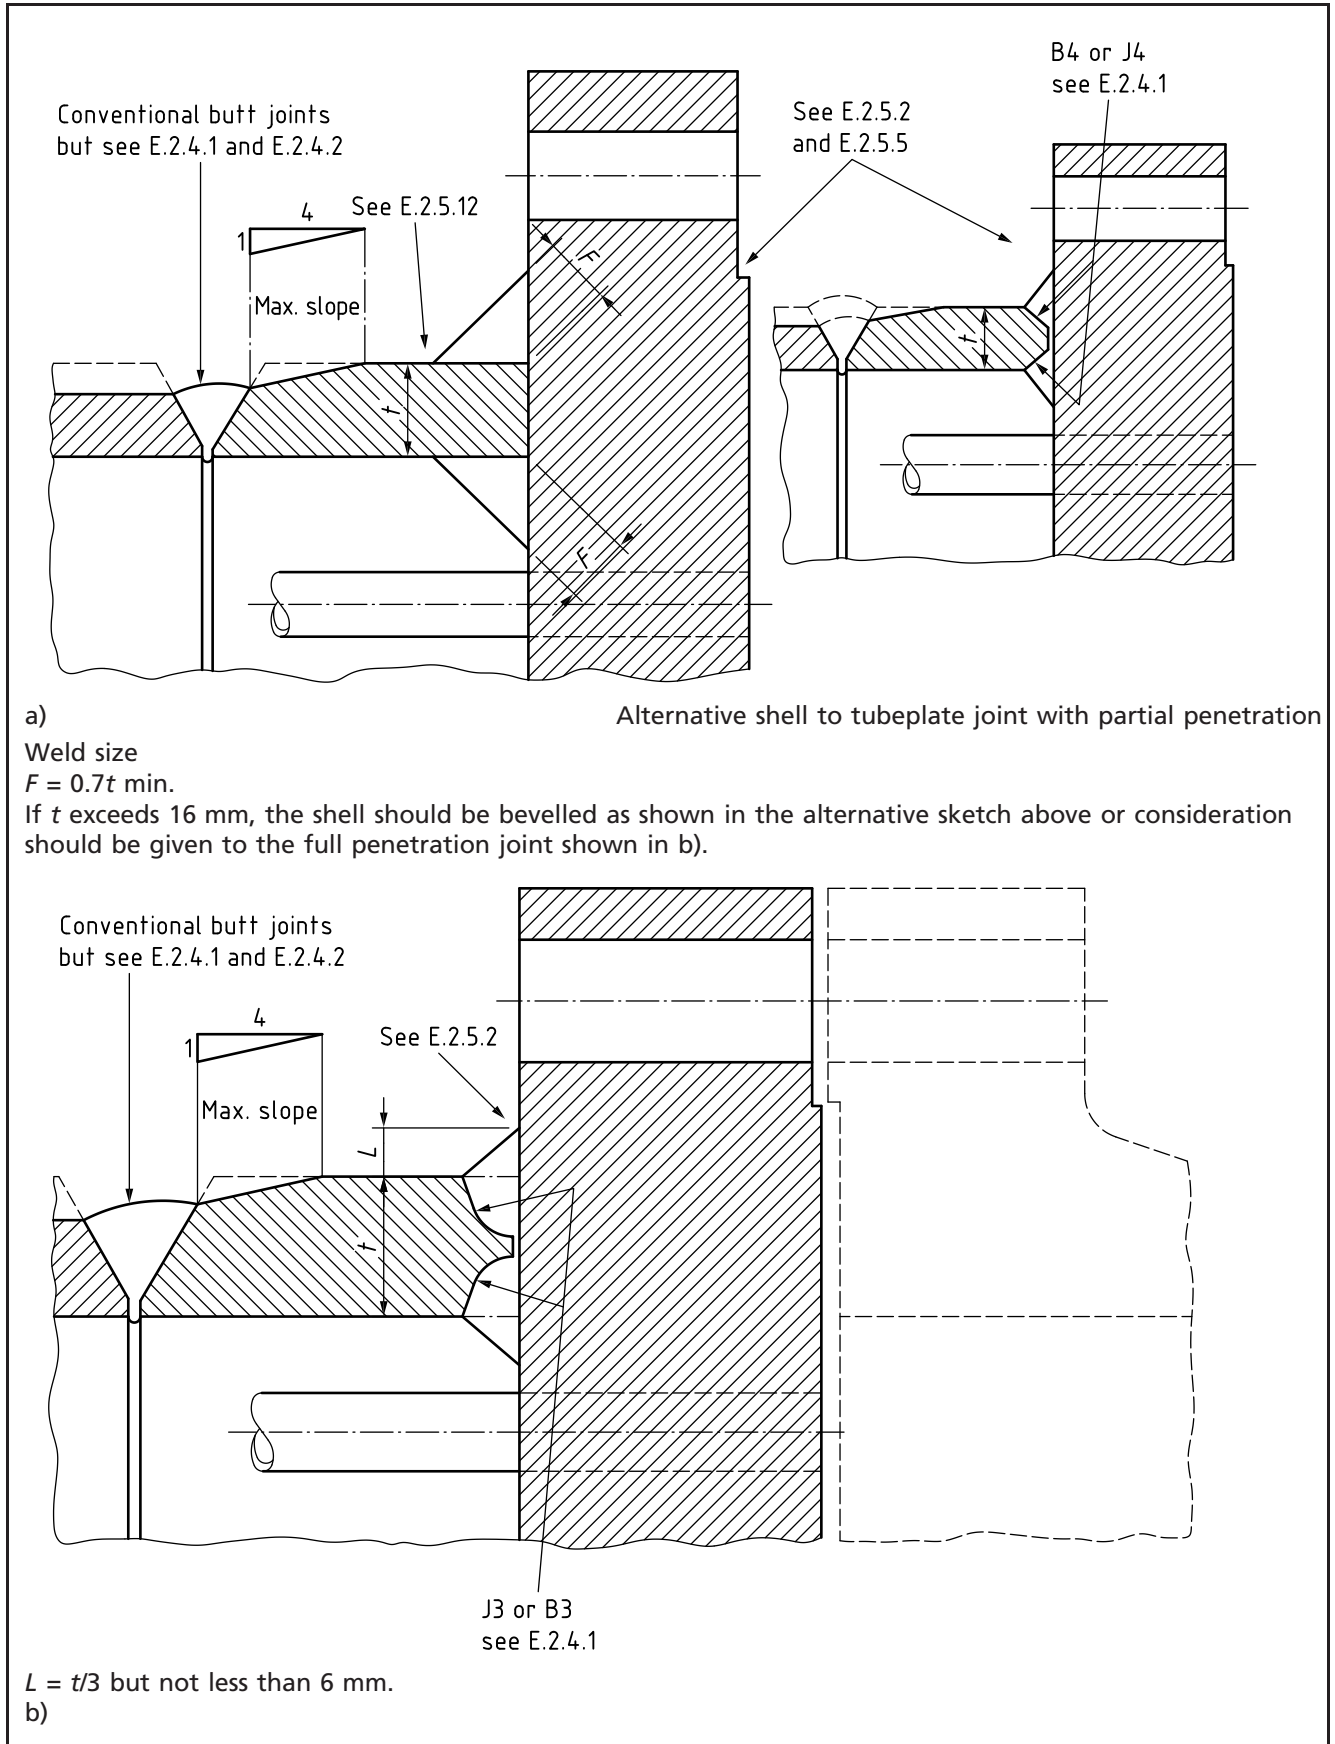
Tubeplate to shell connections: accessible for welding on *both* sides of shell (see E.2.5.8)
